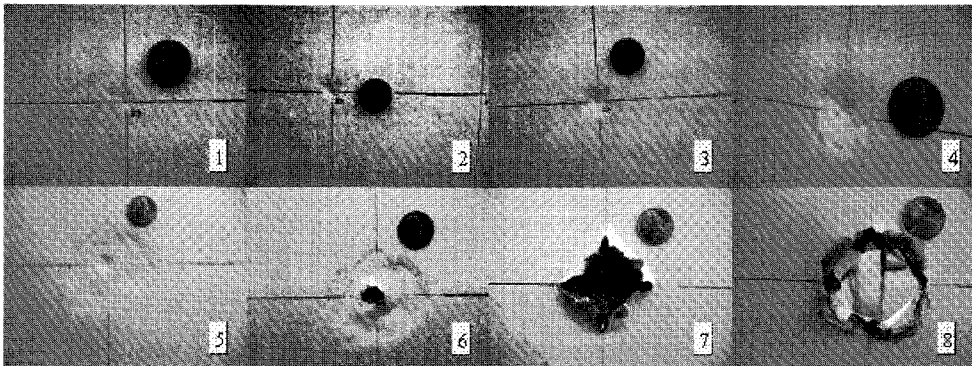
6.25 mm panel damage cases 1-8. The damage cases 1-5 are small face wrinkles (one to eight cm in diameter) causing debonding of the honeycomb structure. Damage case 6 has a hole (0.5 cm diameter). Damage case 7 extends the holes in the front surface (2 cm in diameter) and Damage case 8 is the hole through the entire panel
